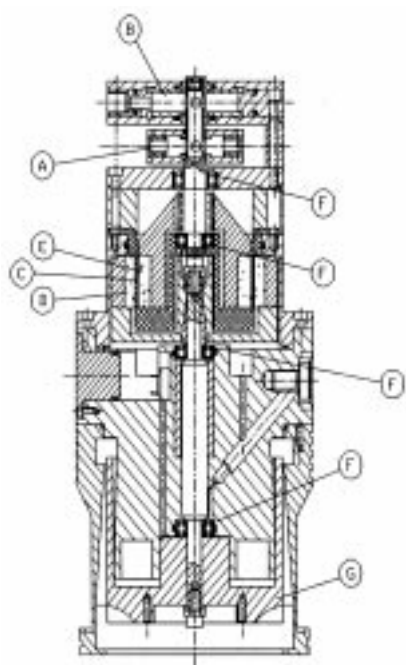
Schematic drawing of a turbo-molecular pump and its motor. A – turbine wheel, B – pressure chamber, C – wall between vacuum and SF_6 gas, D – magnetic ring inside vacuum, E – magnetic ring in SF_6 gas, F – ball bearing, G – turbo-molecular pump wheel.
